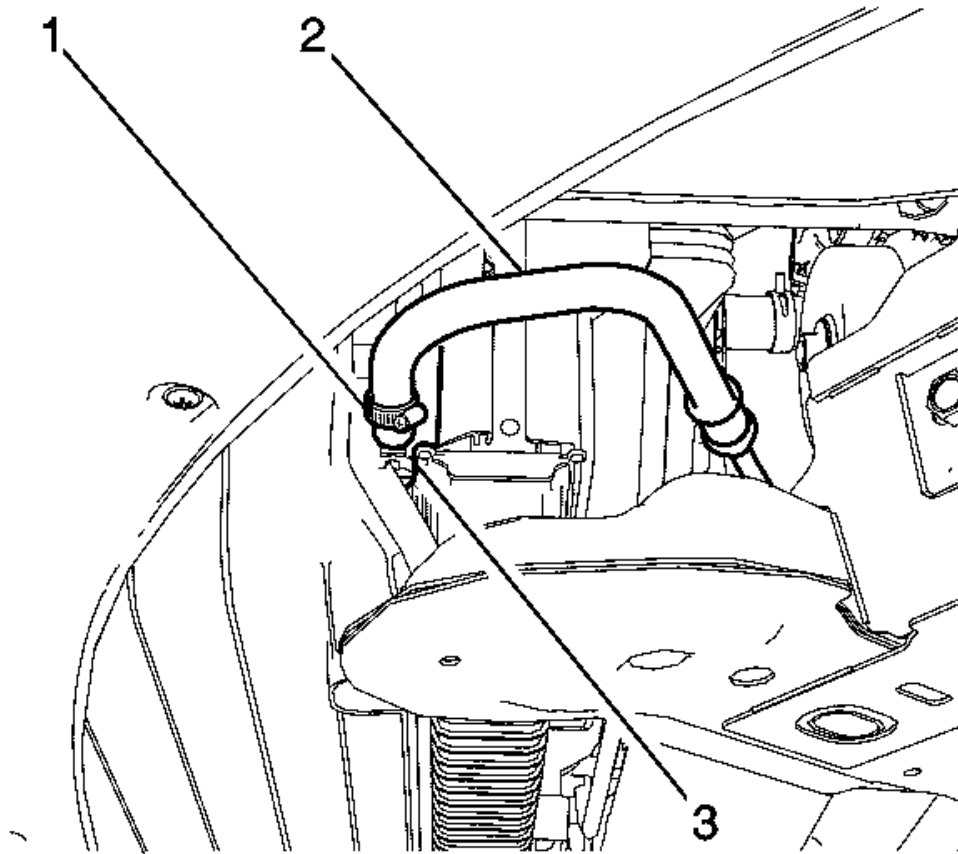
View Of Power Steering Cooler & Power Steering Fluid Reservoir Inlet Pipe/Hose & Spring Clamp
